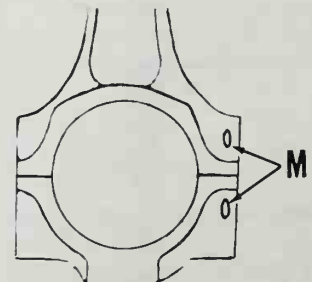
Connecting rod marks (M) must be on same side as shown.
